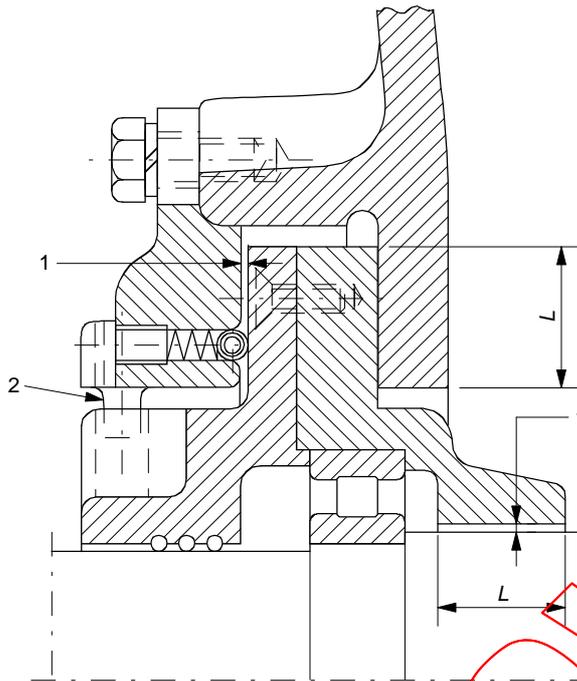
Example of labyrinth joint for shaft of rotating electrical machine
